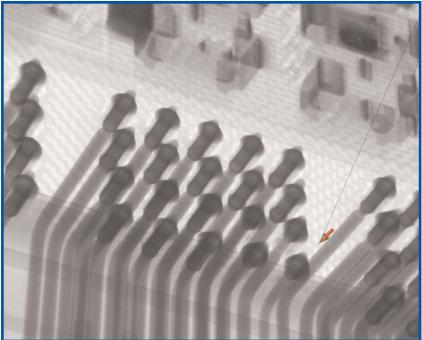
Typical bottomside joints produced using PIHR.
